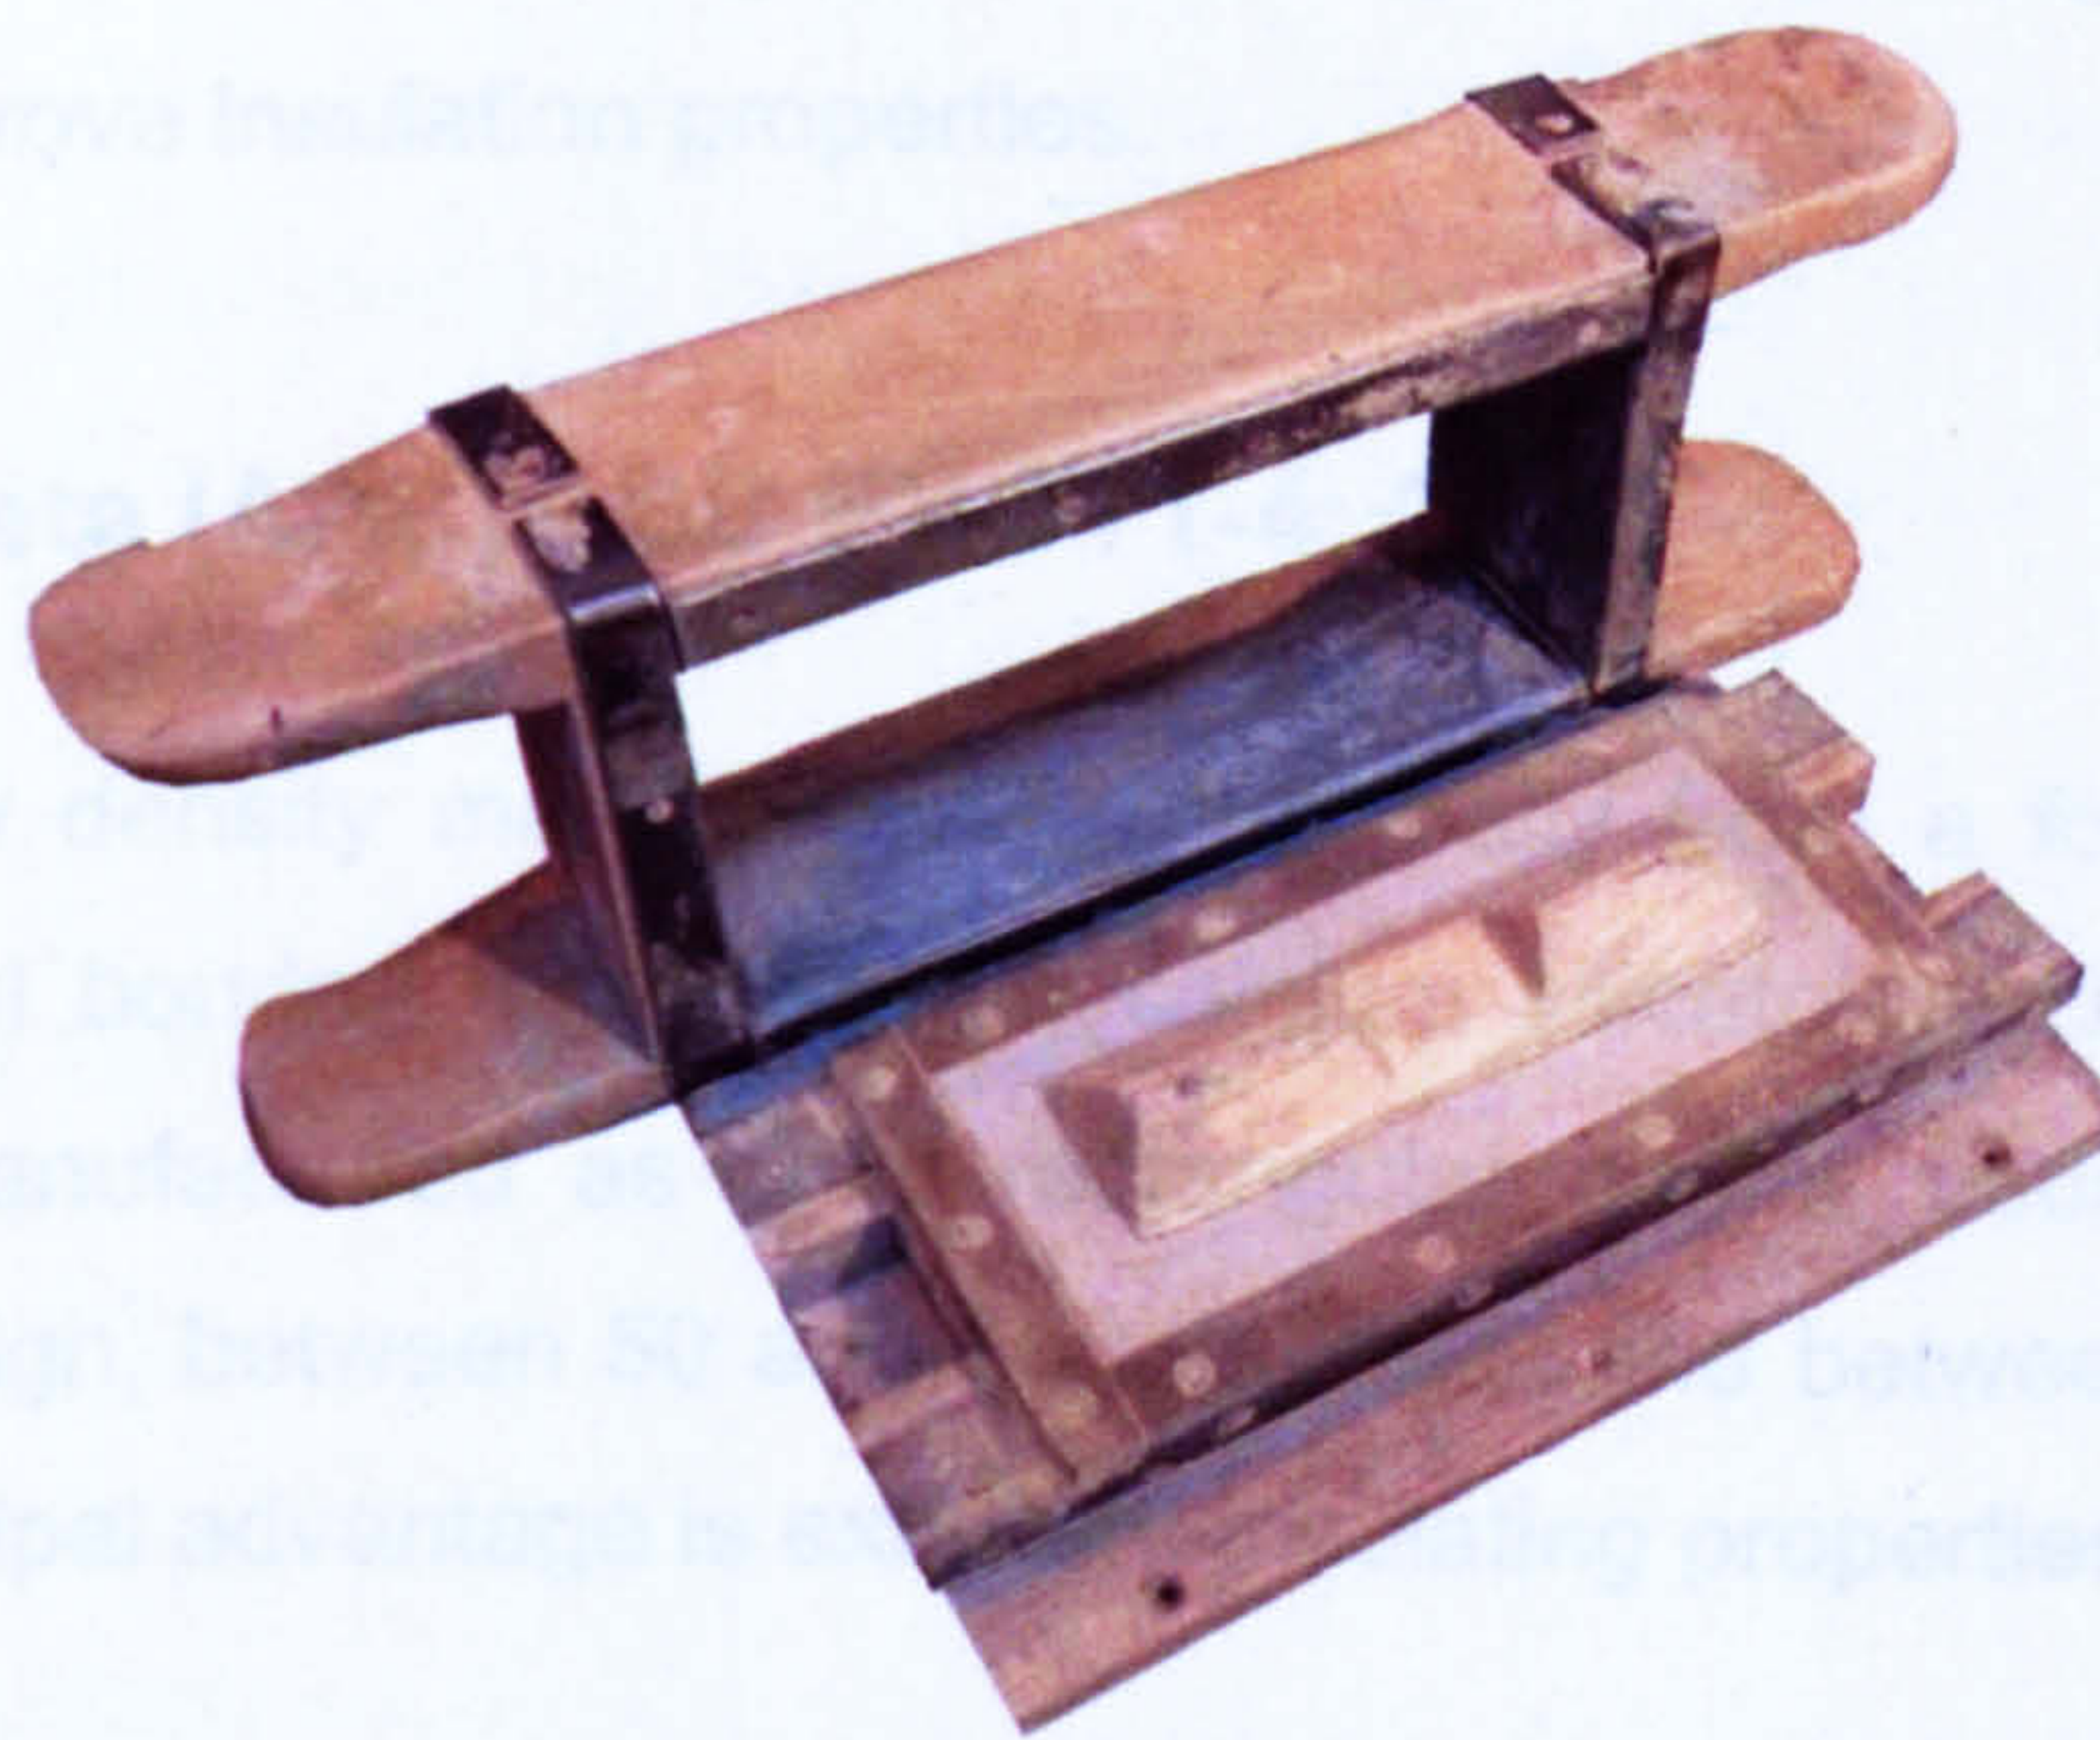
Brick mould disassembled and showing the frog
